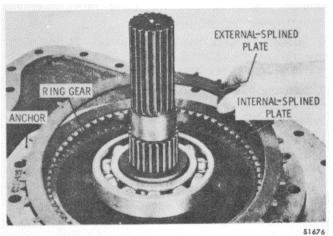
Installing Reverse-Gear Planetary Carrier Assembly
